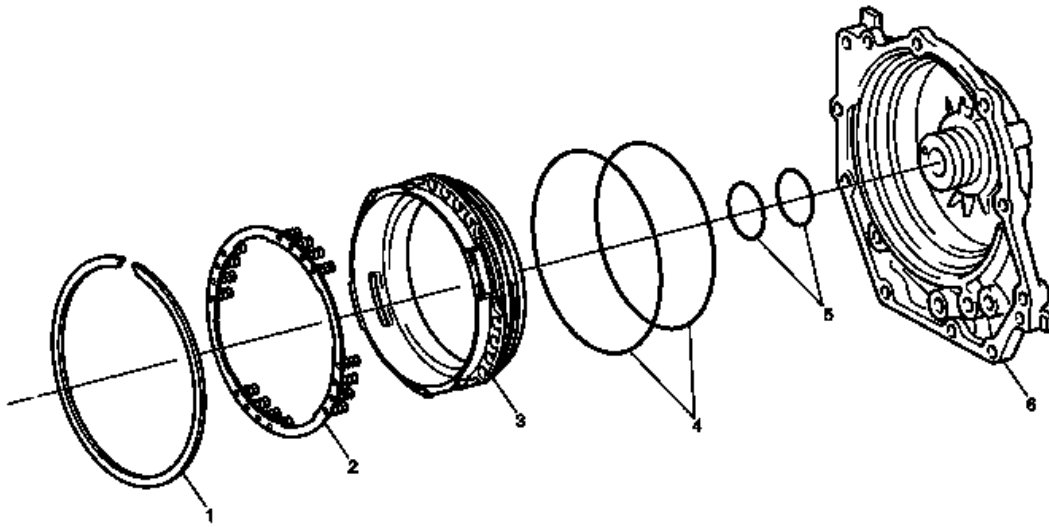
Exploded View Of 2nd Coast and 4th Brake
